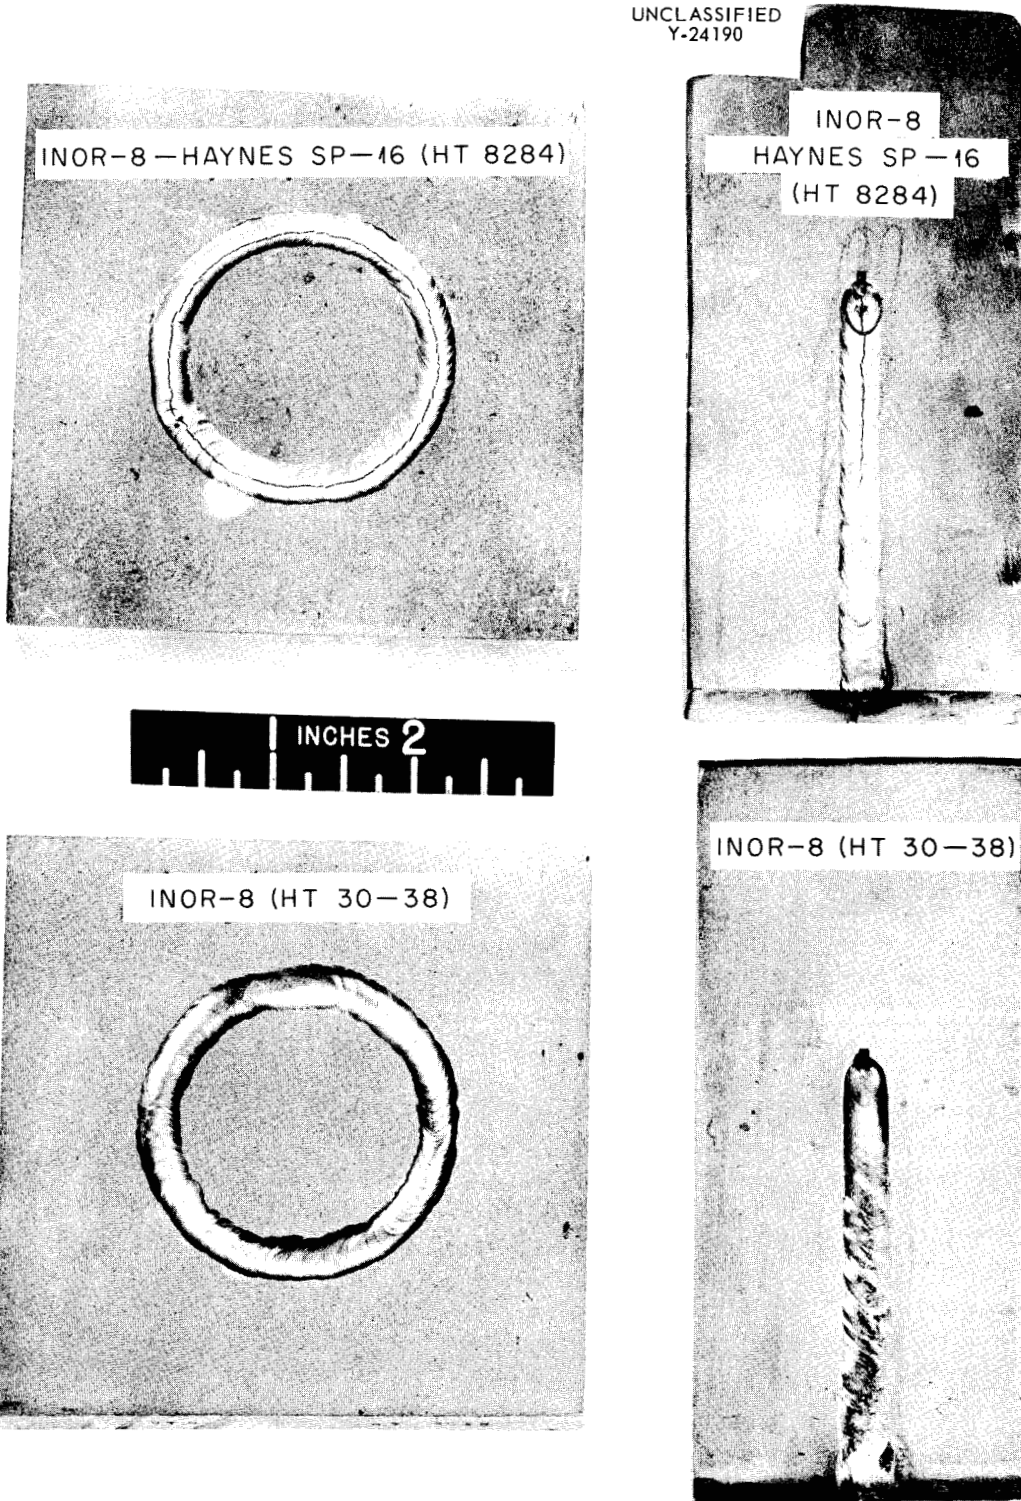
Circular-Groove and Open-End Slot Weld-Cracking Test Specimens.
